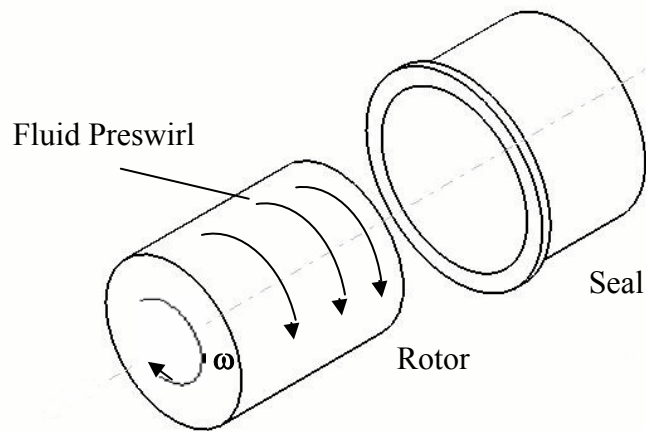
Smooth Seal Rotor Assembly with Fluid Preswirl
